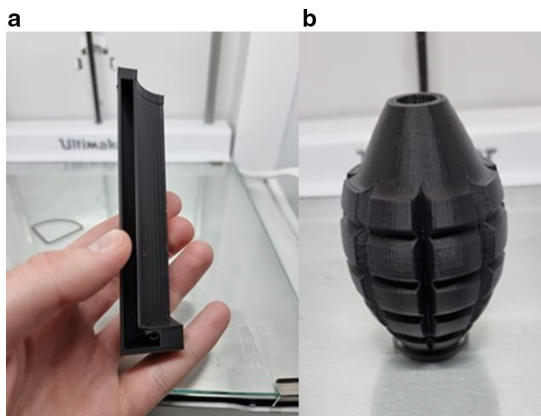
a) Cylindrical 3D printed grenade shell, b) 3D printed standard hand grenade.
